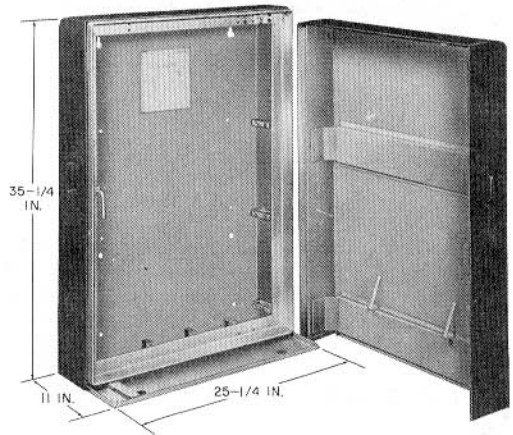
18-Plate Equipment Cabinet per ED-91180-70
